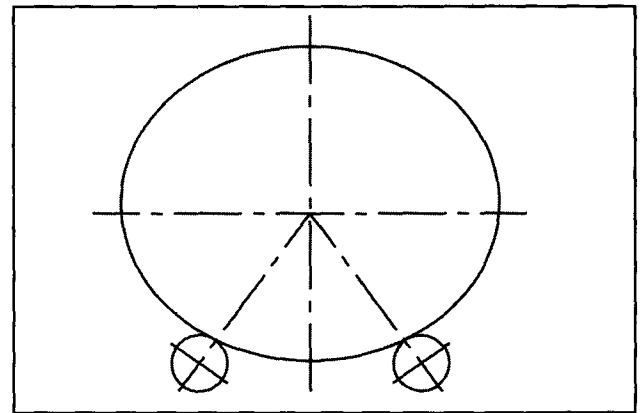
Kiln - deformation of shell riding ring at supporting station.
